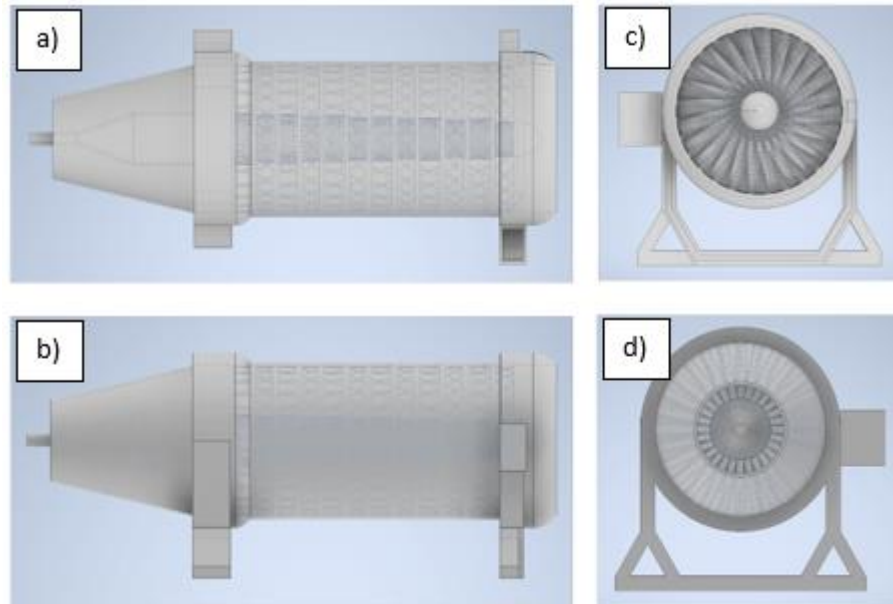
The a) Top; b) Side; c) Front; d) Back View of Aircraft Engine Compressor Learning Kit.
